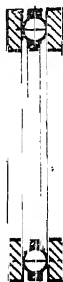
Small extra-light thrust bearing with flat tracks.
